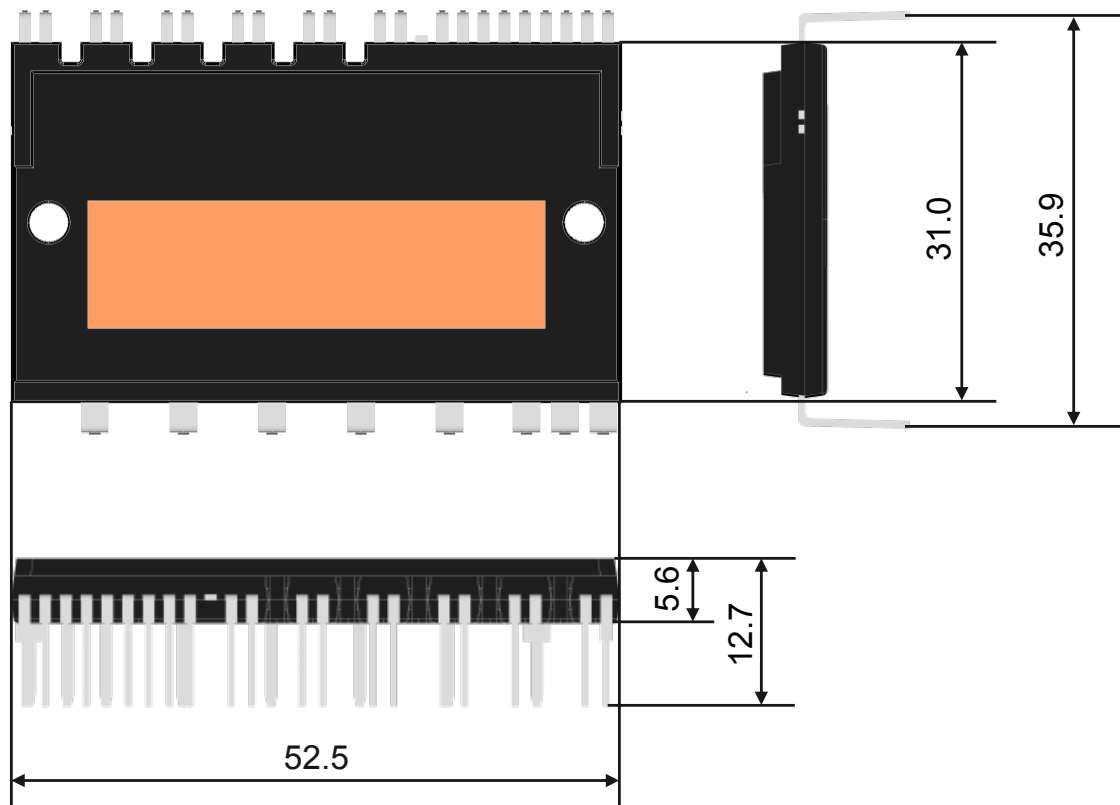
SDIPHP-30L main dimensions shows the main dimensions of the SDIPHP-30L package.
